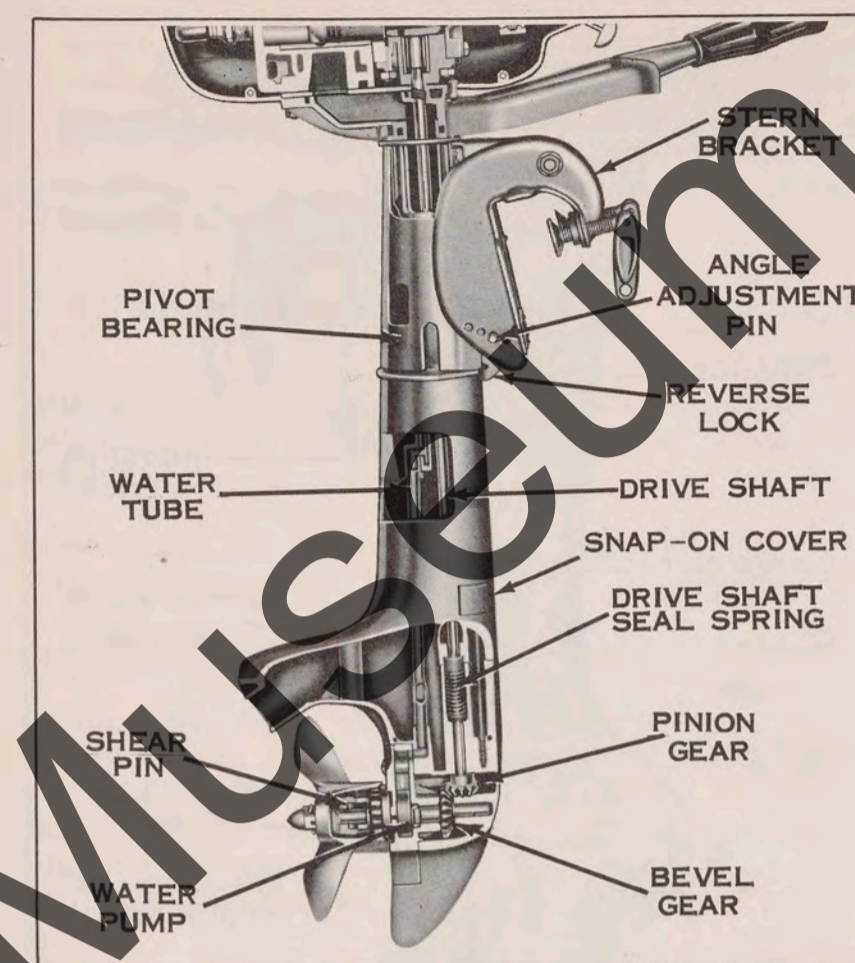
Cutaway of Model 5S10 Lower Unit
